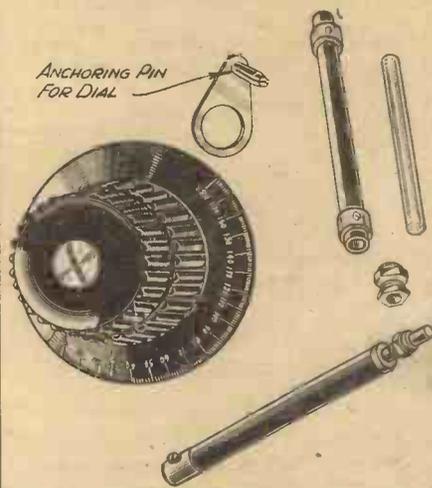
A removable slow-motion drive and some examples of extension spindles.
